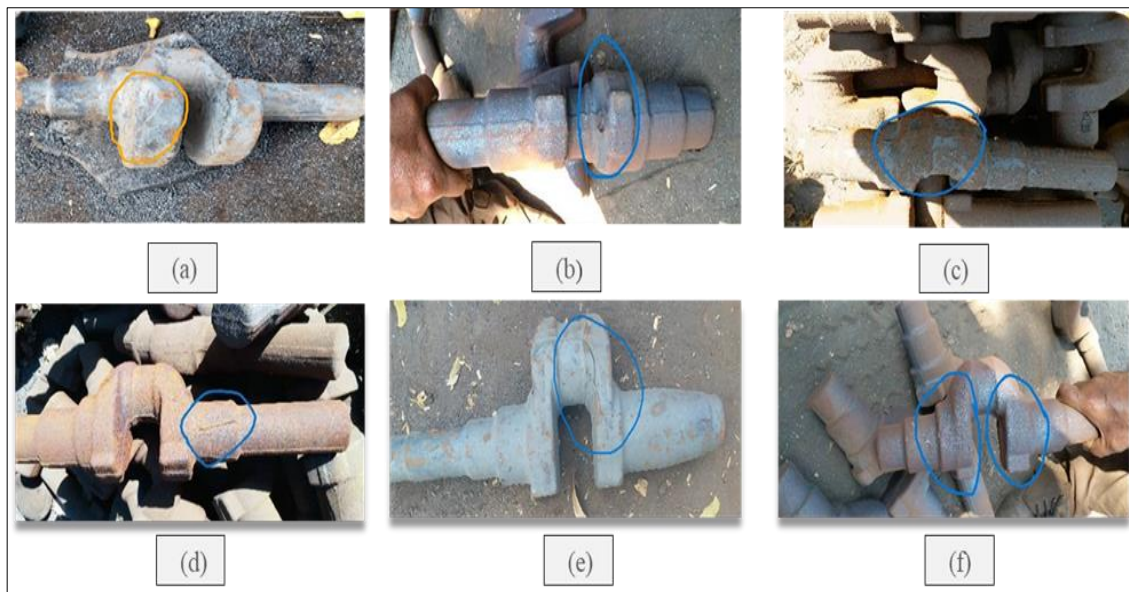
Forging Defects in Crankshafts(a) Unfills at counterbalance weight (b) lap at crankpin (c) Mismatch at side of journal (d) Mislocation on bearing area (e) Crack (f) Scale Pitting at on web and on bearing area.
